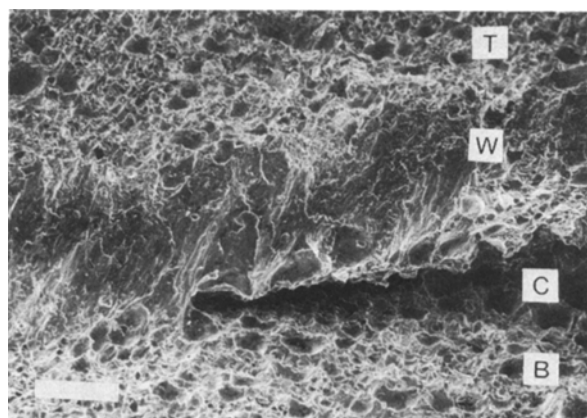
Fracture path along the brass/solder interfaces of a 5% Sb joint soldered at 300°C for 1h then cooled by blown air. Gap = 0.17 mm. B = bottom face, T = top face, W = crack wall. Marker = 100 μm.
